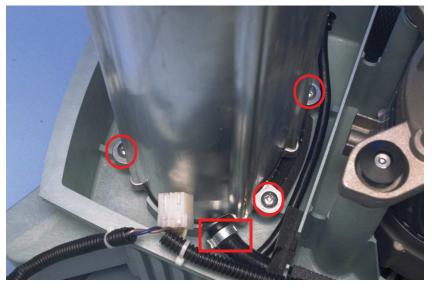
FIGURE AV: LOCATION OF THE ONE-EARED CLAMP AND MOUNTING SCREWS(3 OF 4 SHOWN IN PICTURE)
